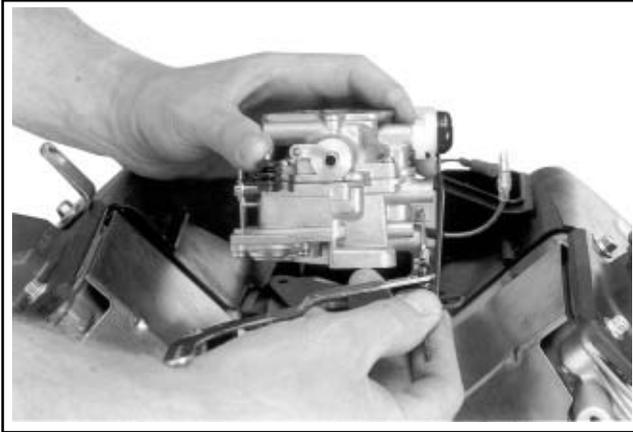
Removing Carburetor Assembly with Governor Lever Attached.
